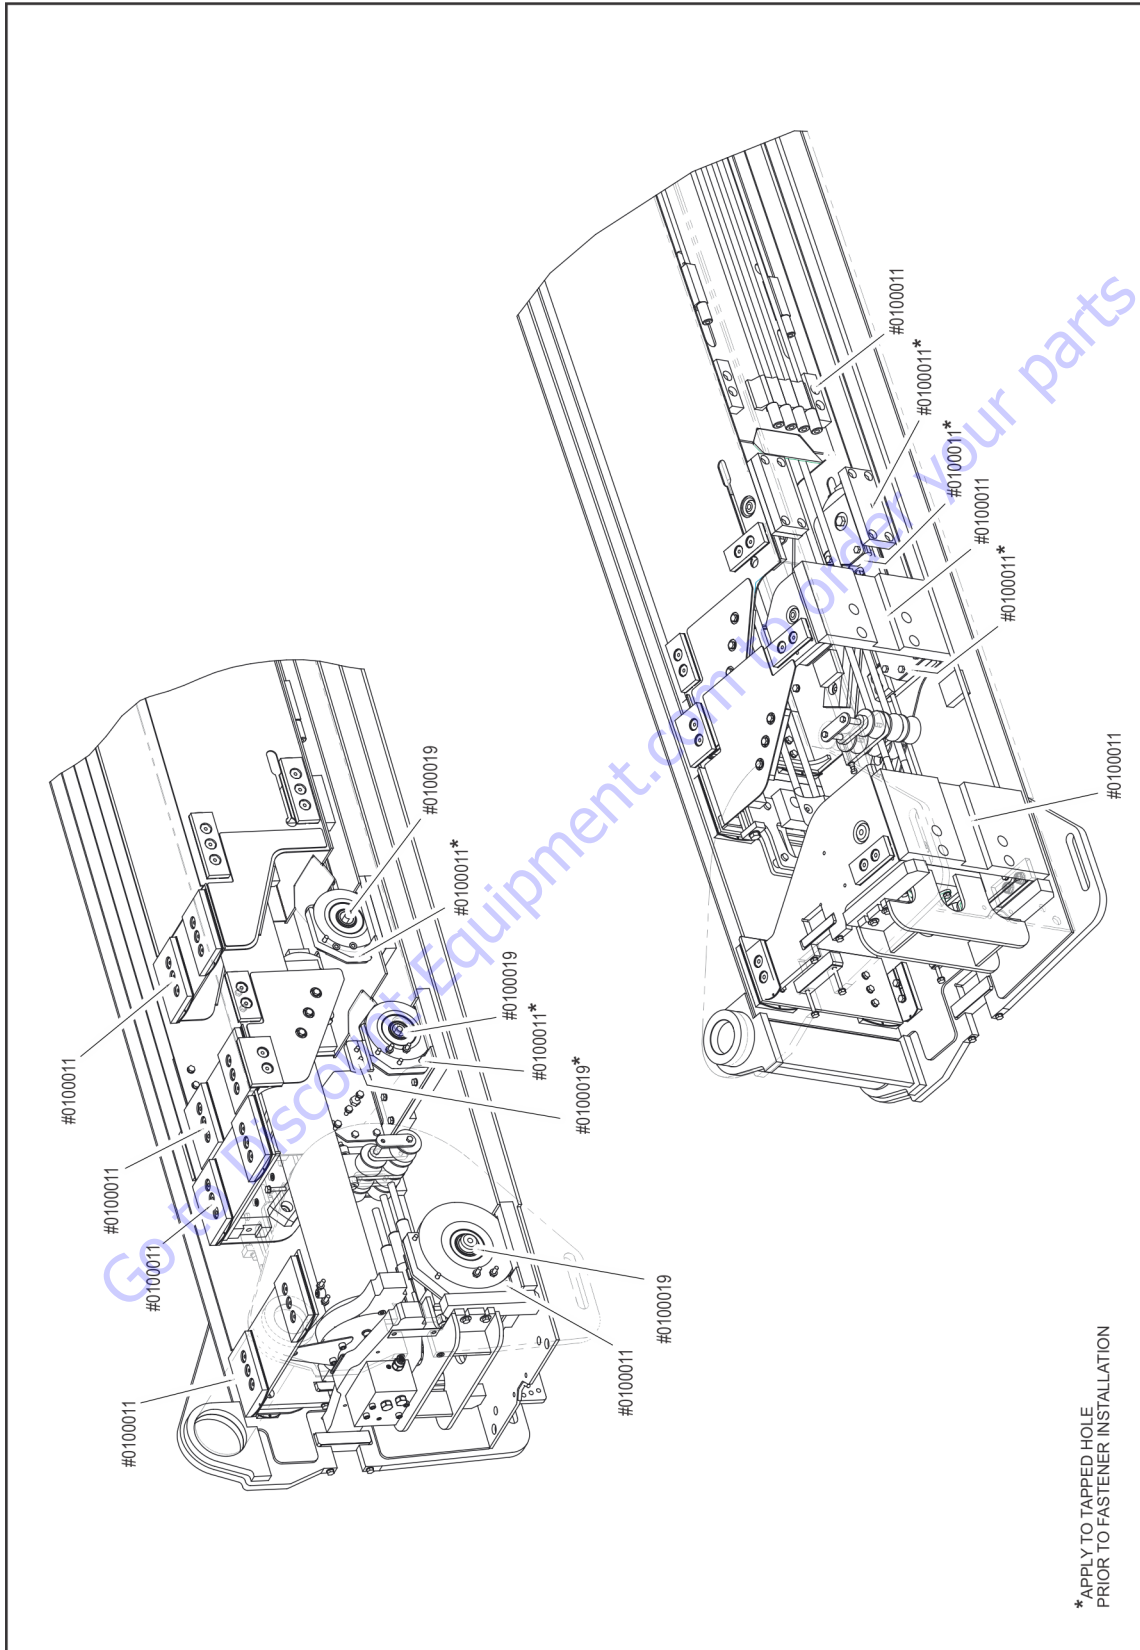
Locations for Threadlocker Application - Sheet 1 of 5
